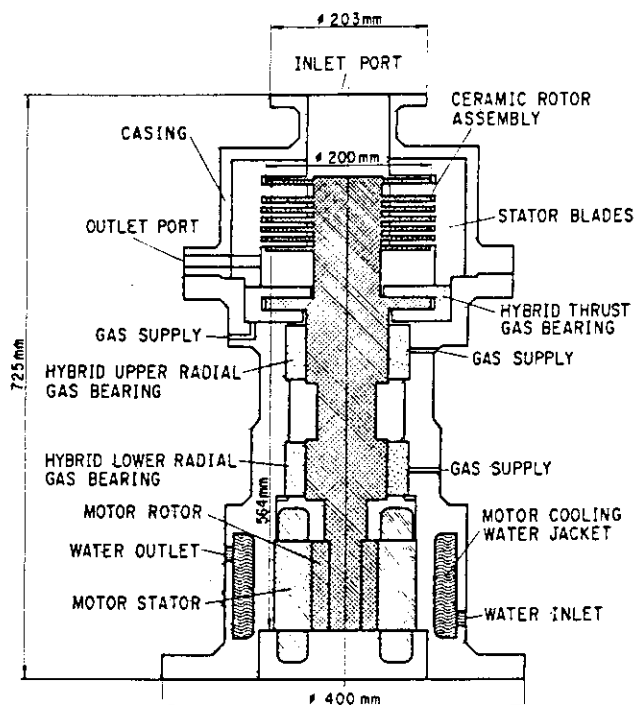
Cross-sectional view of the large-size ceramic turbo-viscous pump.
